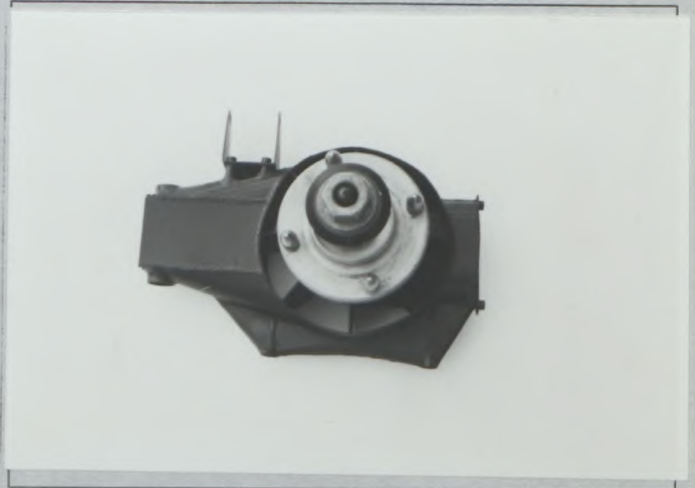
ADJUSTABLE STABILIZER ASSEMBLY
